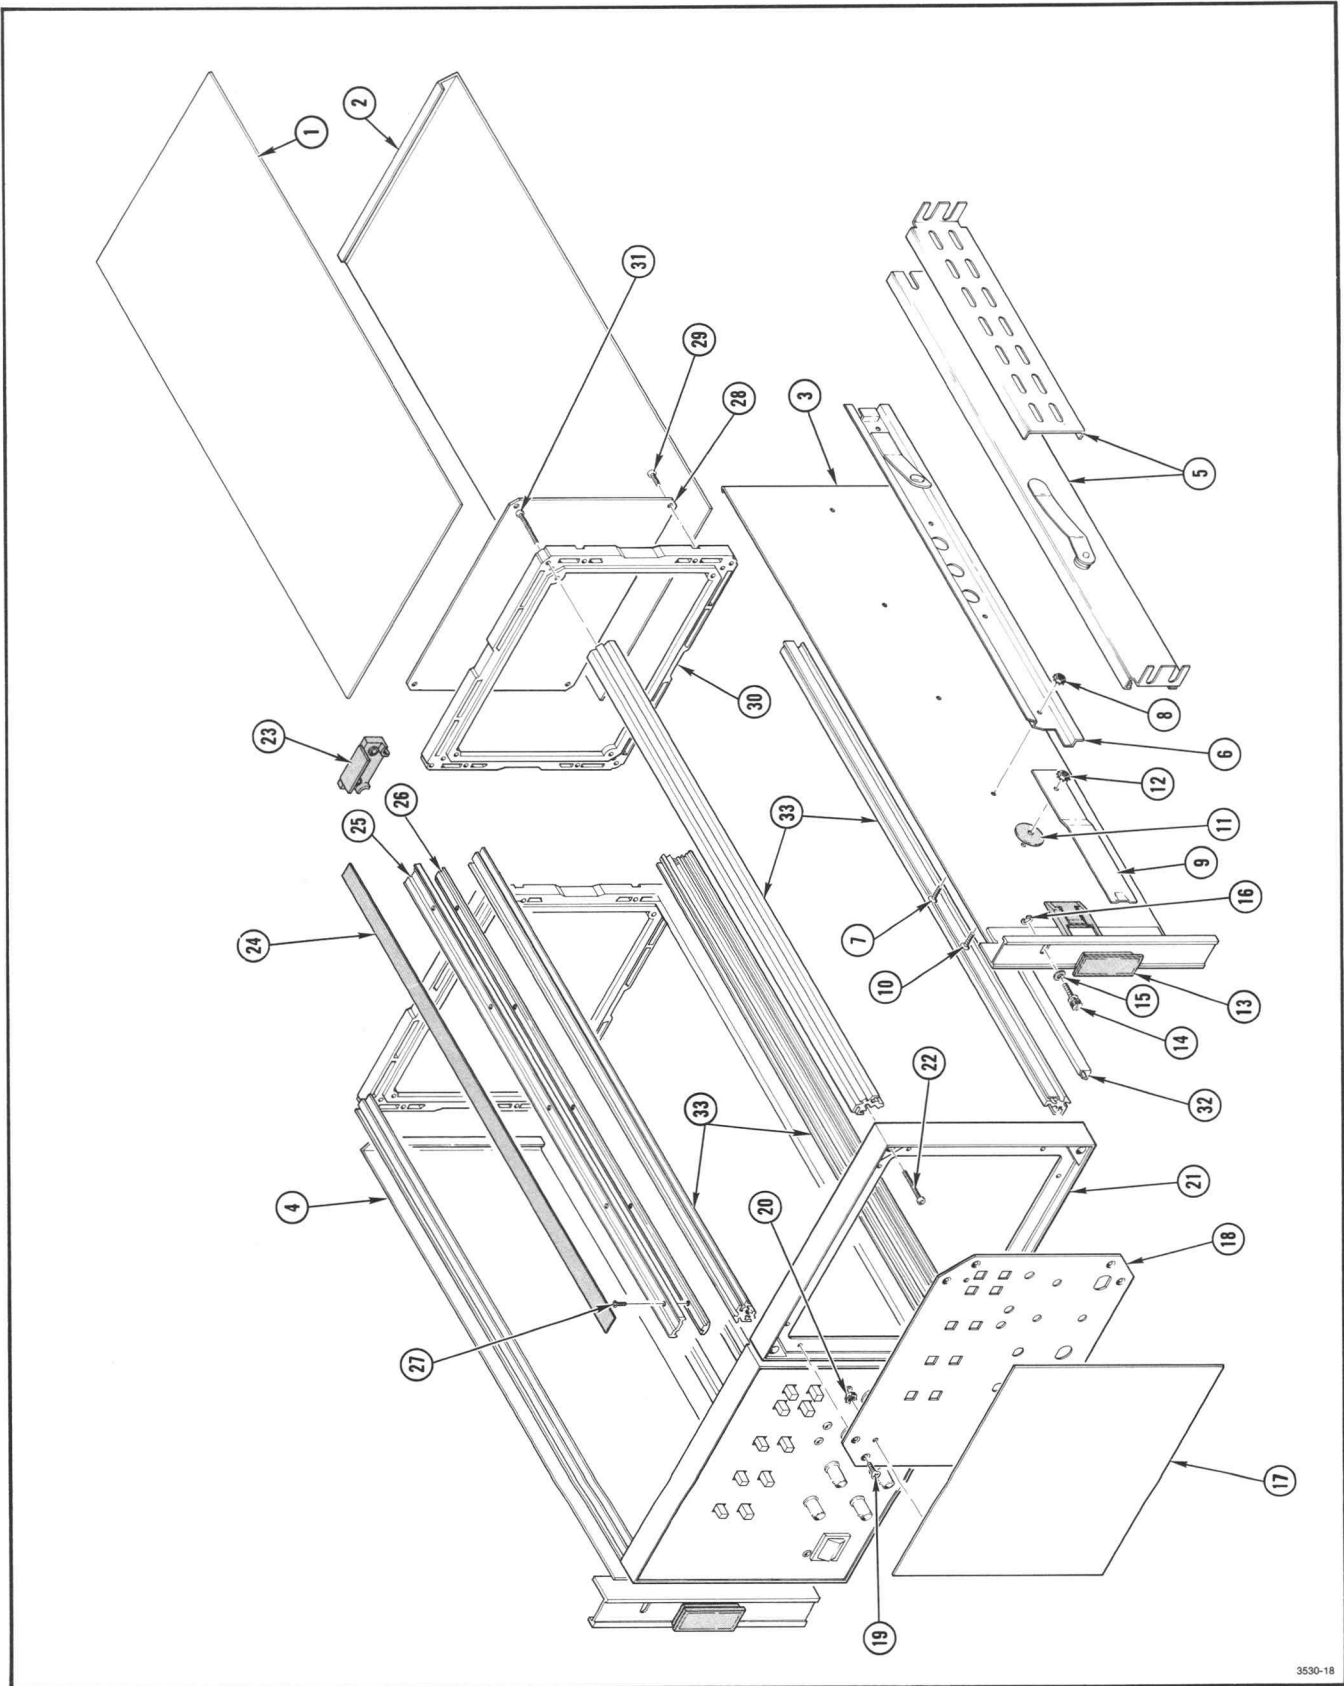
Exploded View of The 'Dummy' Box Beside a Test Modulator.
